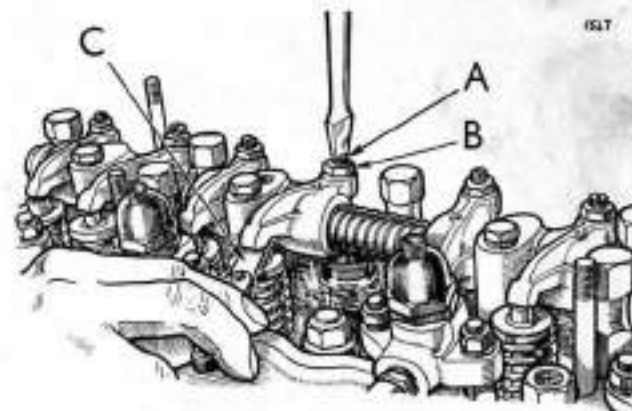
/15. SETTING THE VALVE CLEARANCE
